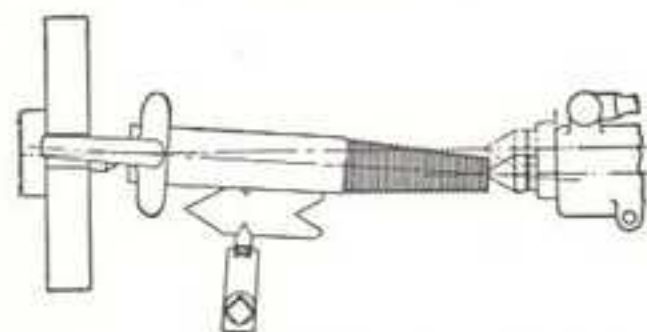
Cutting Tapered Threads with Tailstock Center Set Over
